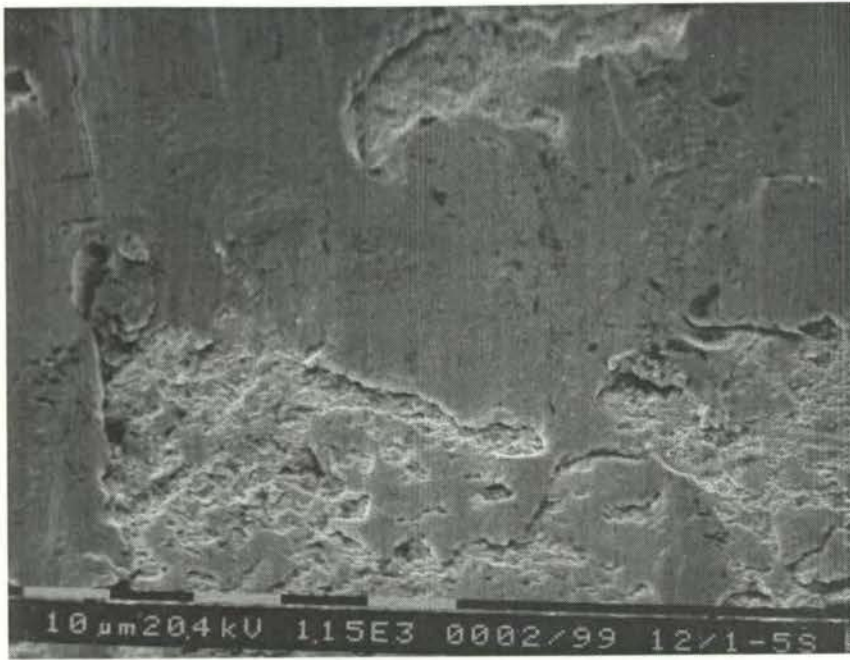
42 Initial pitting and plucking of the rake face of KMF tool due to detachment of adhered workpiece material (same tool as in Figure 7.40 at a higher magnification)
